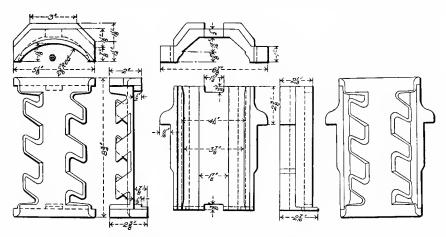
Spiral Journal Bearing for 5 in, by 9 in, Journals. St. Louis Car Company.
